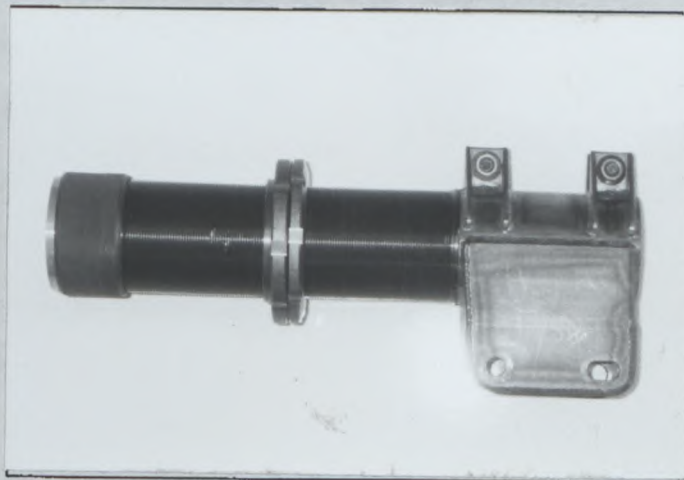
REINFORCED REAR STRUT CASE TYPE B
